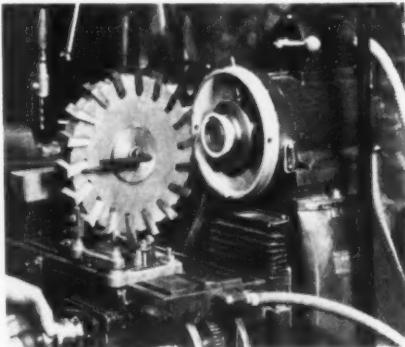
30-inch diameter segmented type diamond sawing disc for marble sawing. Norton Co.
